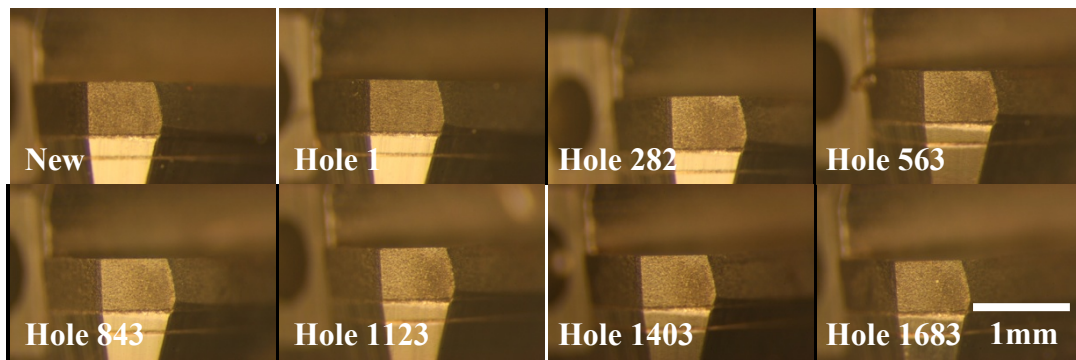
Tool wear micrographs of brazed PCD CTM302 reamer under 70bar through-hole cutting fluid, 32m/min cutting speed (Test 7)
